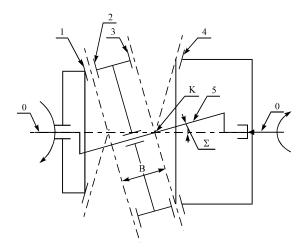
Scheme of coaxial gearbox based on bevel precessional gear
